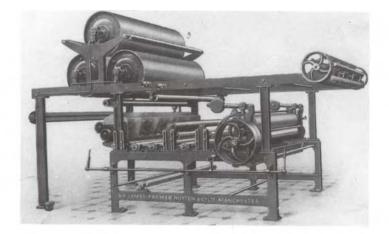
4-burner gas singeing machine (Courtesy of Farmer Norton Co. Ltd.).
